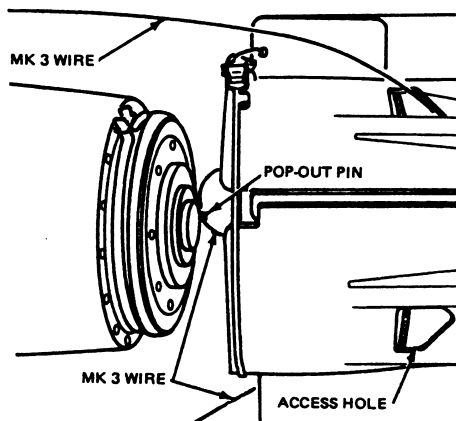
Mk 3 arming wire routed through fin and pop-out pin.
